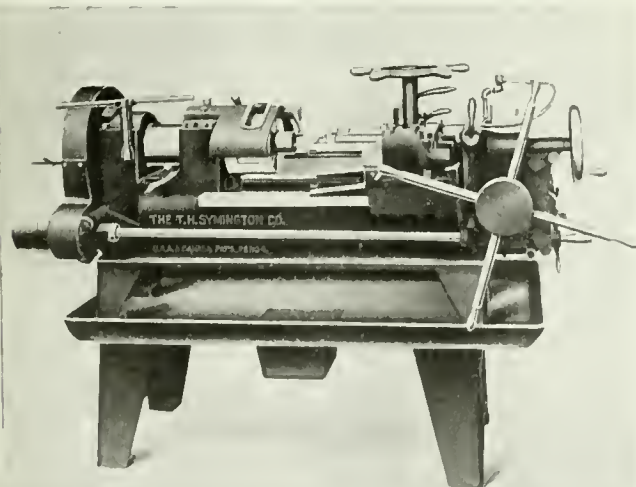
TRIPLE TOOL BORING LATHE FOR FINISHING INTERIOR OF SHELL.
